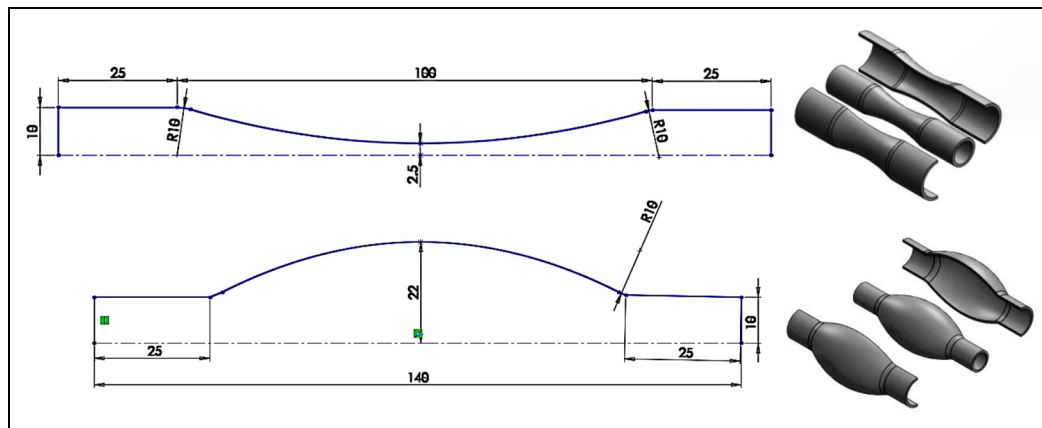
Top panel: drawings for a respective stenosis (left) and the mould configuration (right) for a manufactured stenosis of 10 cm length and 0.5 cm minimum diameter. Bottom panel: technical drawings for a respective aneurysm (left) and the mould configuration (right) for a manufactured aneurysm of 9 cm length and 4.4 cm maximum diameter. All dimensions are in mm.
